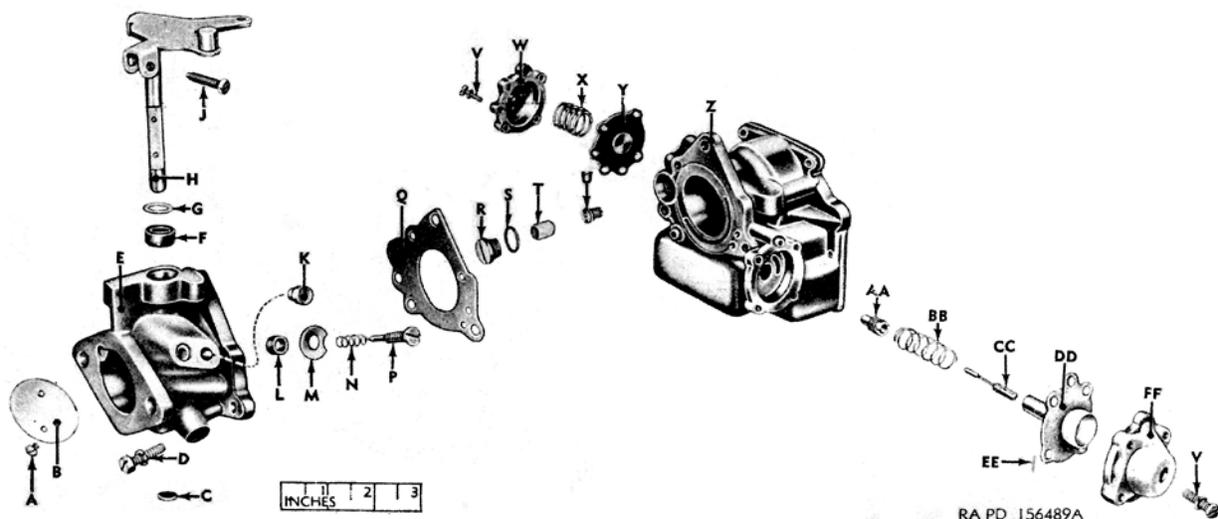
Type Y-S carburetor, model 6378—exploded view—Continued
